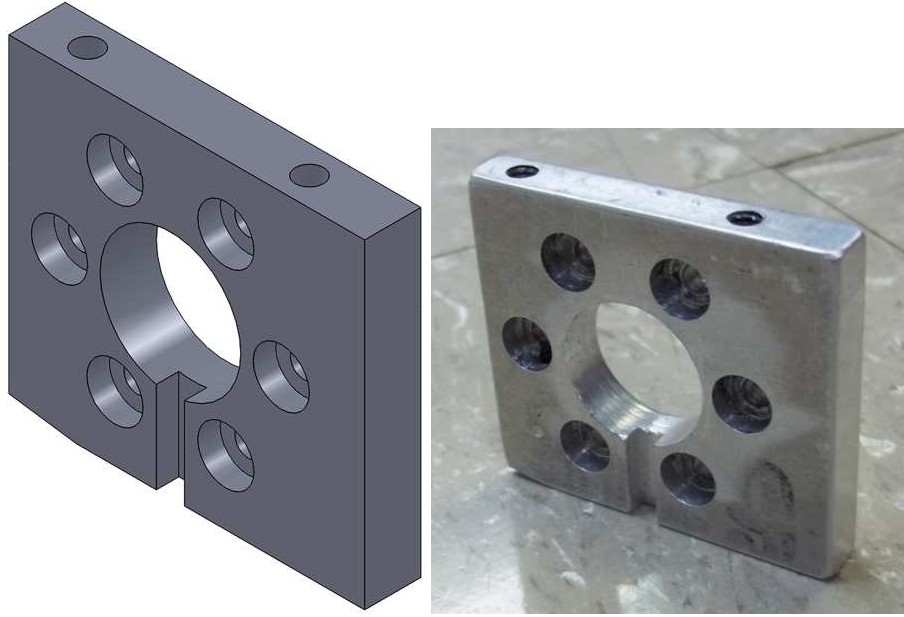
Computer model of the motor bracket (left) and machined motor bracket (right).
